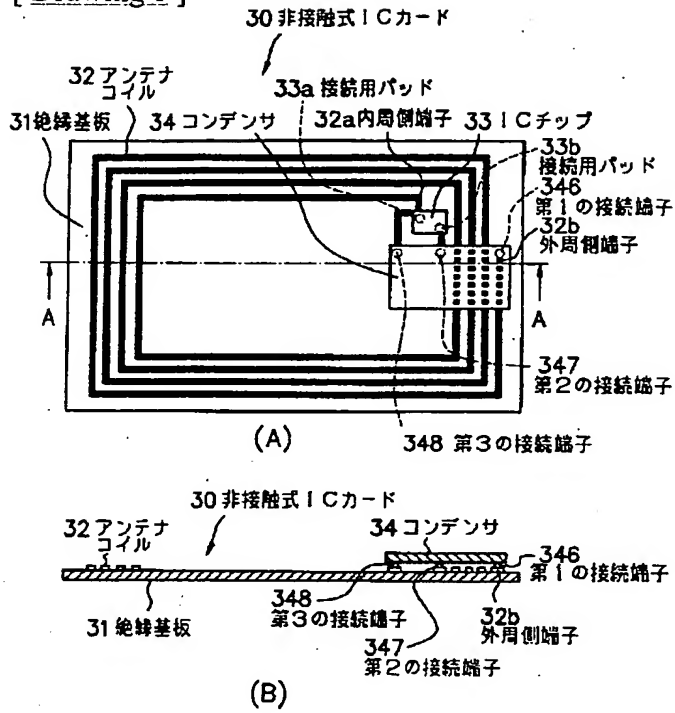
The plan and A-A line cross-section side elevation showing an example of the conventional noncontact IC card.
